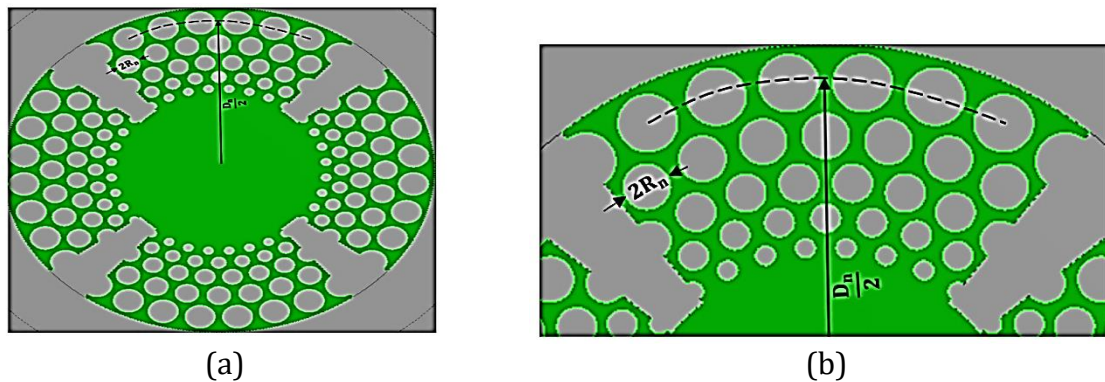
(a) Trim disc (b) Quarter disc with dimensions
